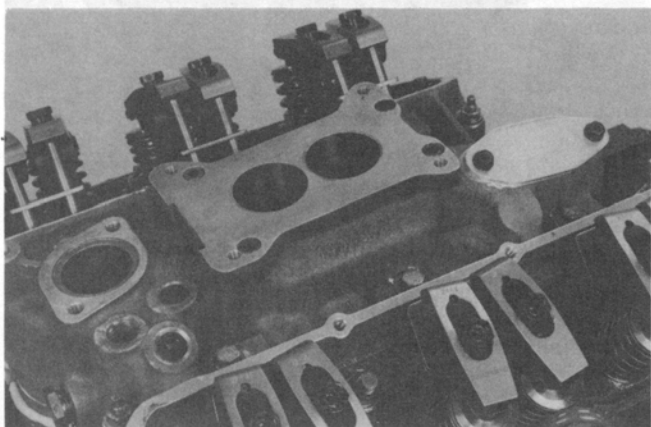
Two-barrel carburetor adapter and EGR block-off plate.
